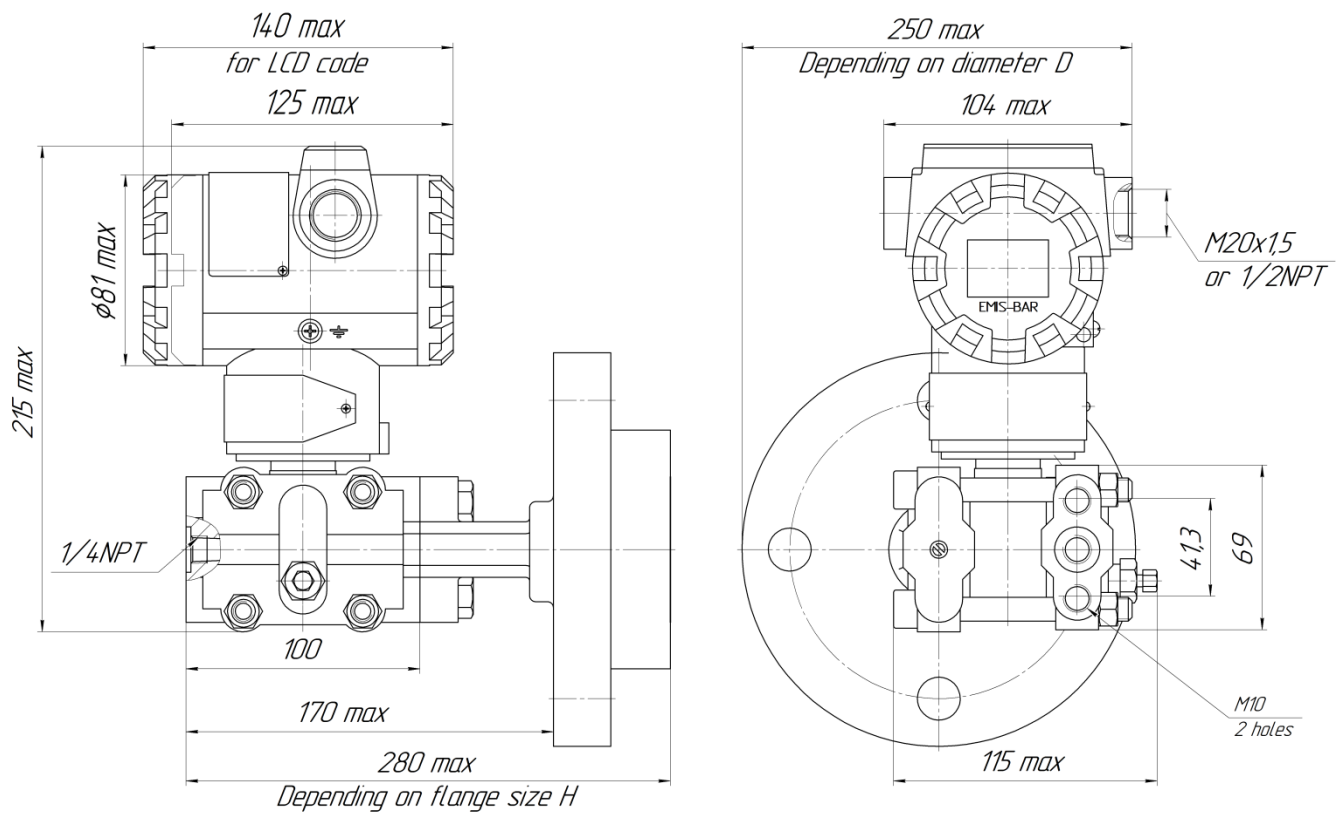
Dimensions and connection sizes of in-line mount pressure transmitters EMIS-BAR 113 with fully-welded diaphragm seal
